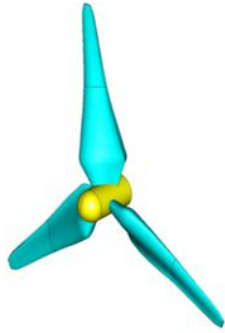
CAD DRAWING OF THE SANDIA TURBINE.
